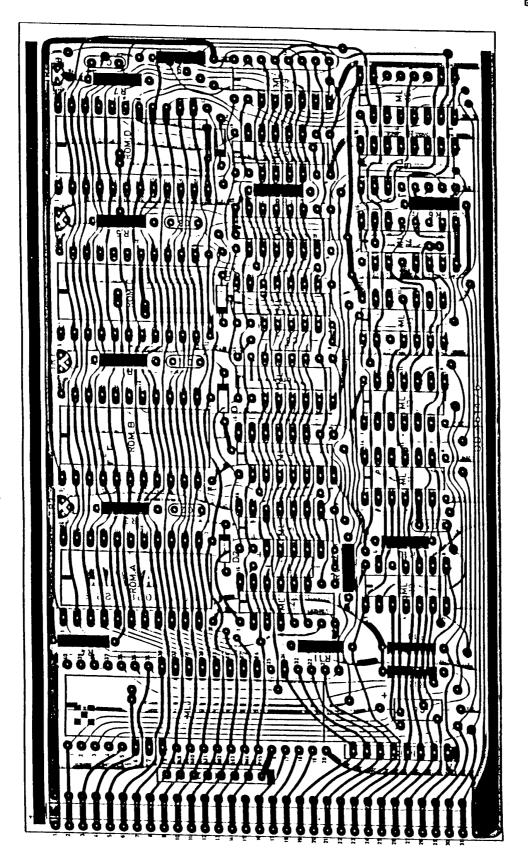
3.3 MA. 4231 Control Board PCB. Layout
